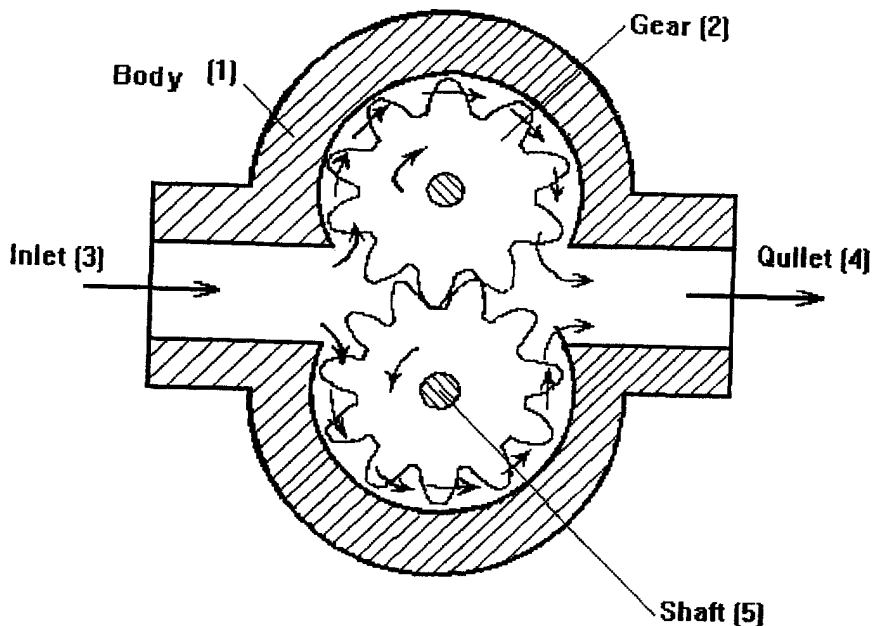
Gear metering pump: 1 - body; 2 - gear; 3 - inlet; 4 - outlet; 5 - shaft.
